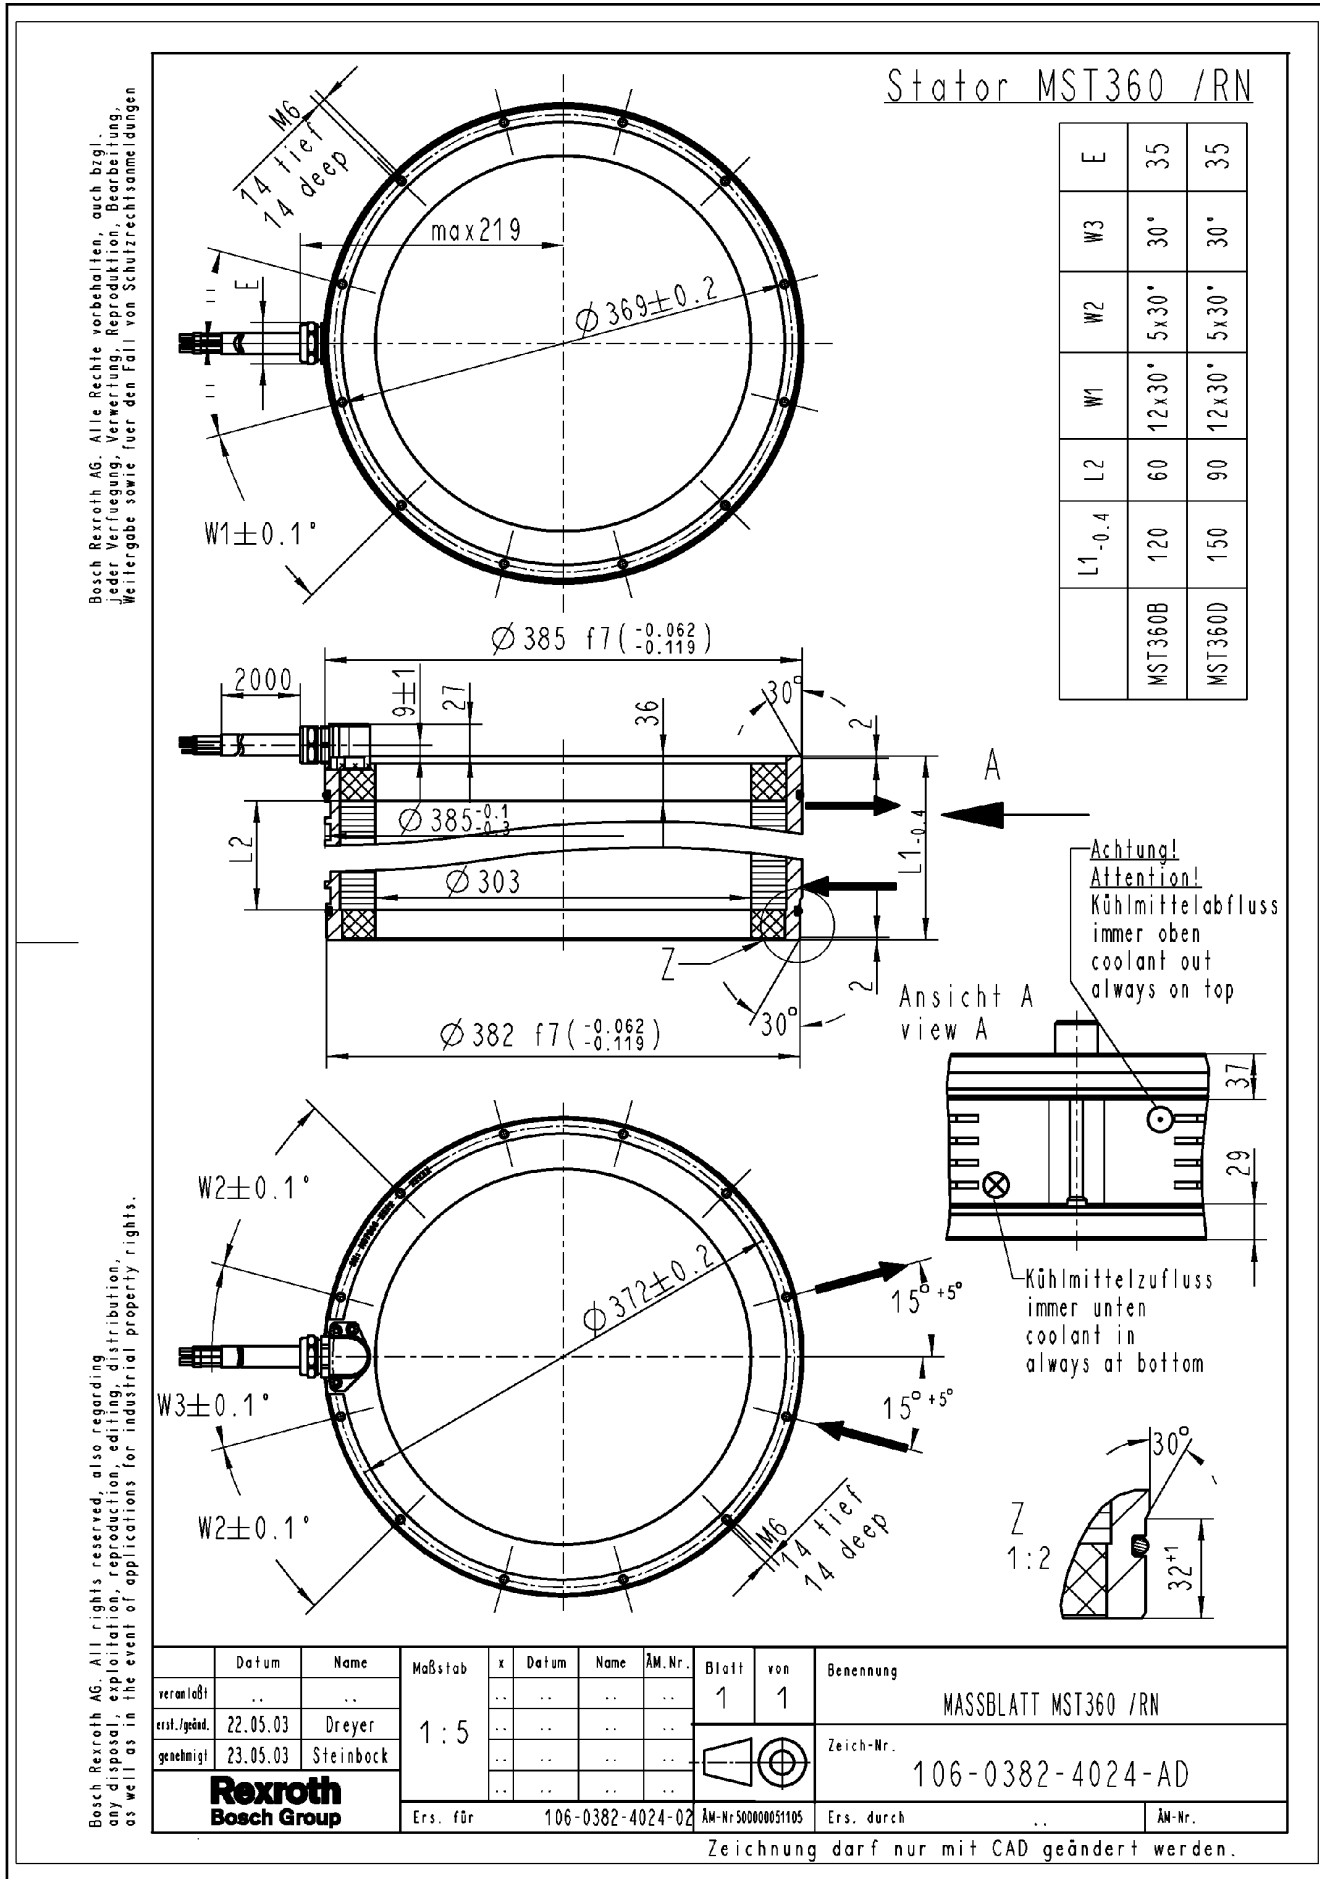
Dimension sheet MST360, electrical connection "RN"
